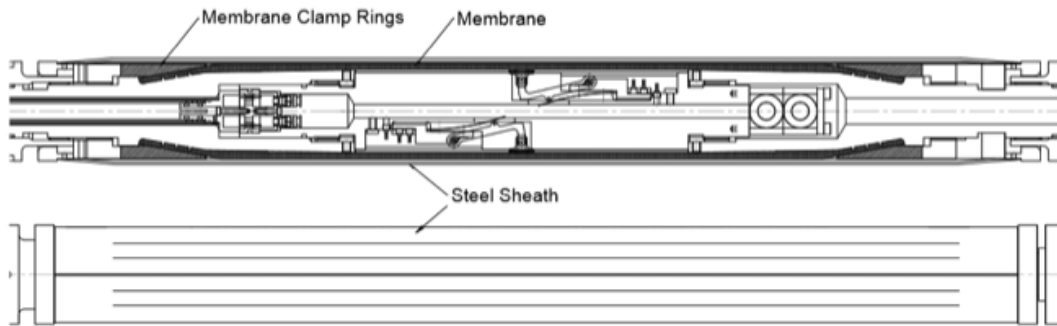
The inner mechanical design (upper) and outside view (lower) of the central part of the pressuremeter
